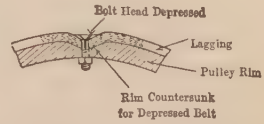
Countersinking Rim of Pulley for Lagging Bolts.
